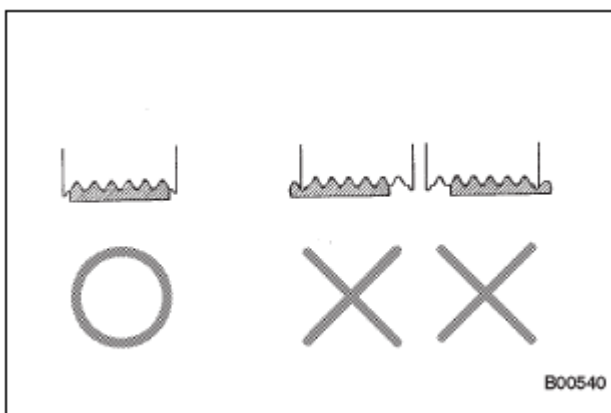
Identifying Proper And Improper Setting Of Fan And Generator V-Belt On Rib Grooves
